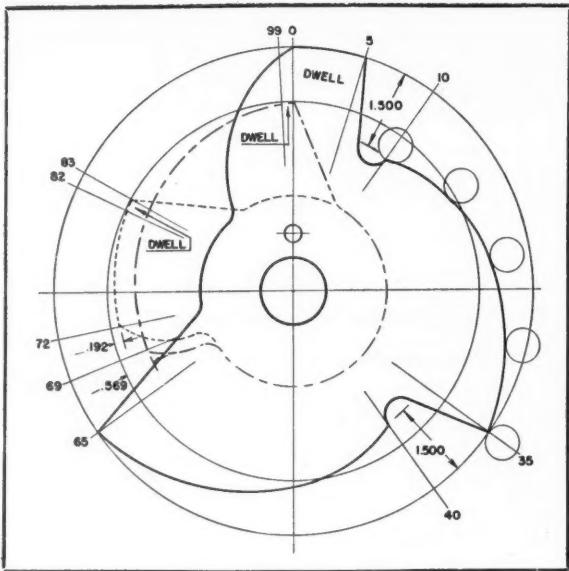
Illustration Showing Method of Drawing Cam from Information Presented in Data Sheet Fig. 1
